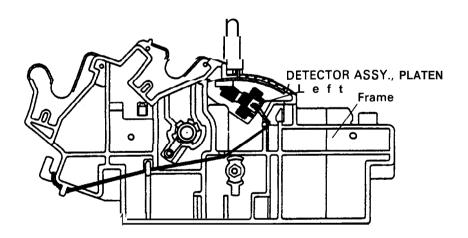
Removing the DETECTOR ASSY., PLATEN
